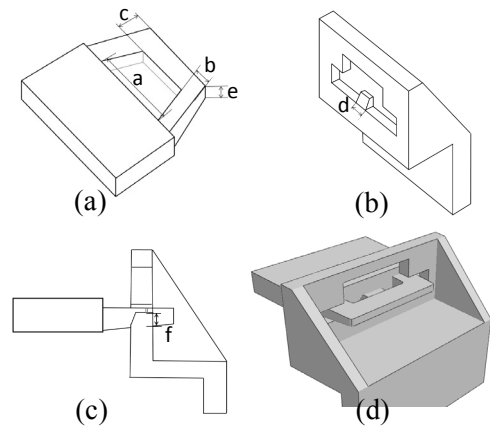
Schematic of hybrid type snap-fit and design variables. (a) Beam part, (b) mate part, side view of assembled snap-fit, and (d) isometric view of assembled snap-fit
